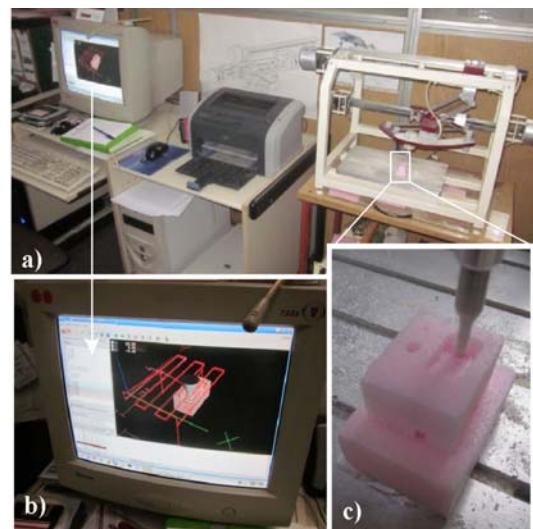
Machining benchmark workpiece based on the original STEP-NC program according to ISO 14649-11
